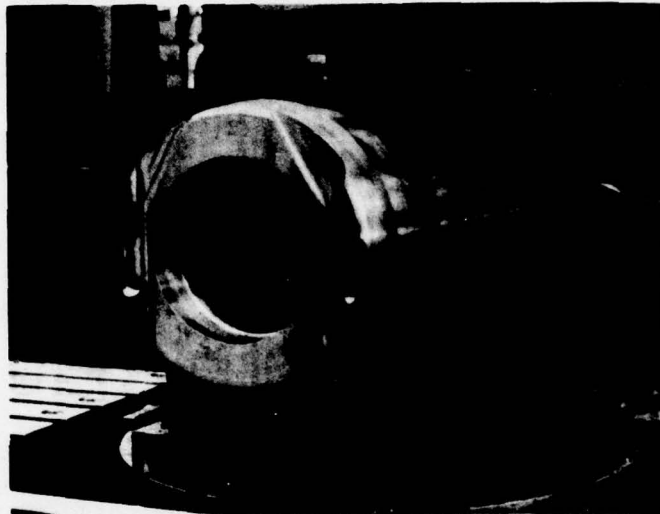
N/C Machine with Facsimile of the 105mm M68 Breech Mounted on Table.
